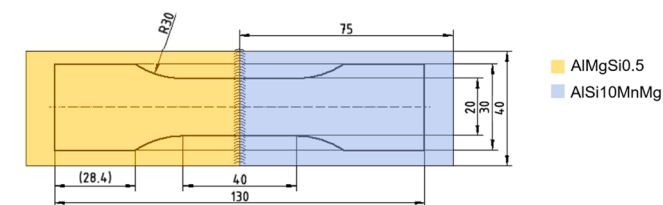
Specimen geometry for characterization of laser welded joints via quasistatic tensile testing.
